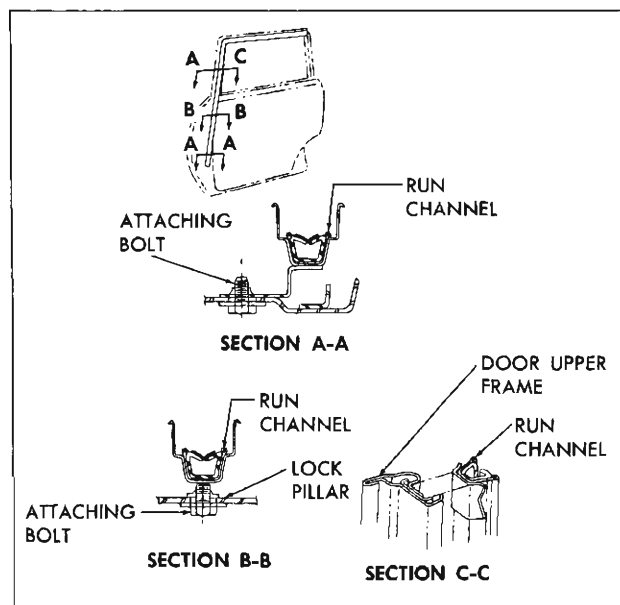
Rear Door Window Front Glass Run Channel Assembly
